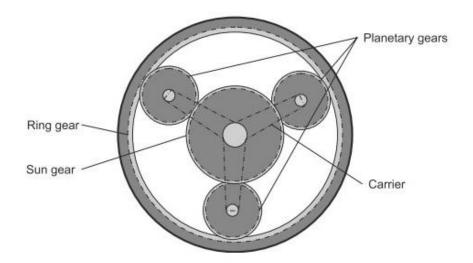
The planetary gear set consists of the sun, the ring gear and the carrier with the planetary gears.<sup>41</sup>
